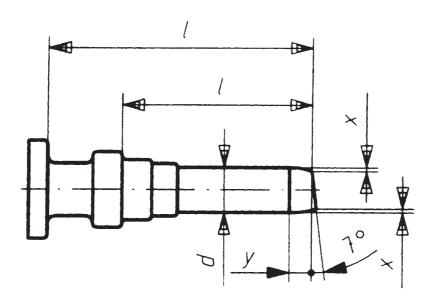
Typical length dimensions and tolerances for deformation of sheared ends
